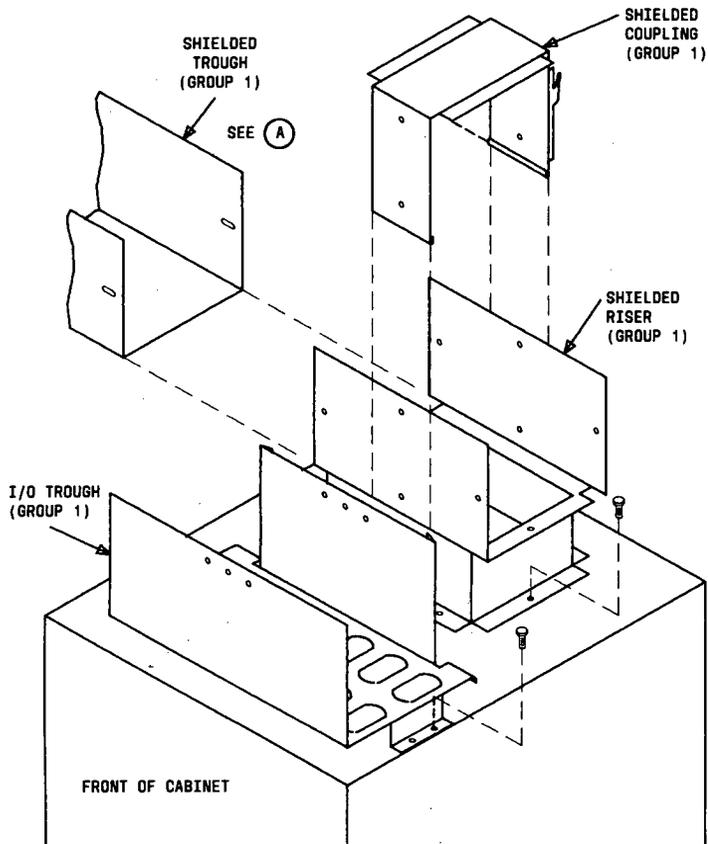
Overhead View of A Typical Duct Work Installation
